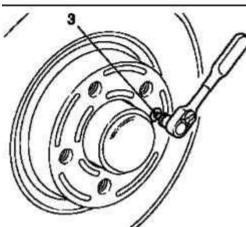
Removing the brake disk: 1 - spud, 2 - bolts fastening the guide pads 3 - Tightening bolt
